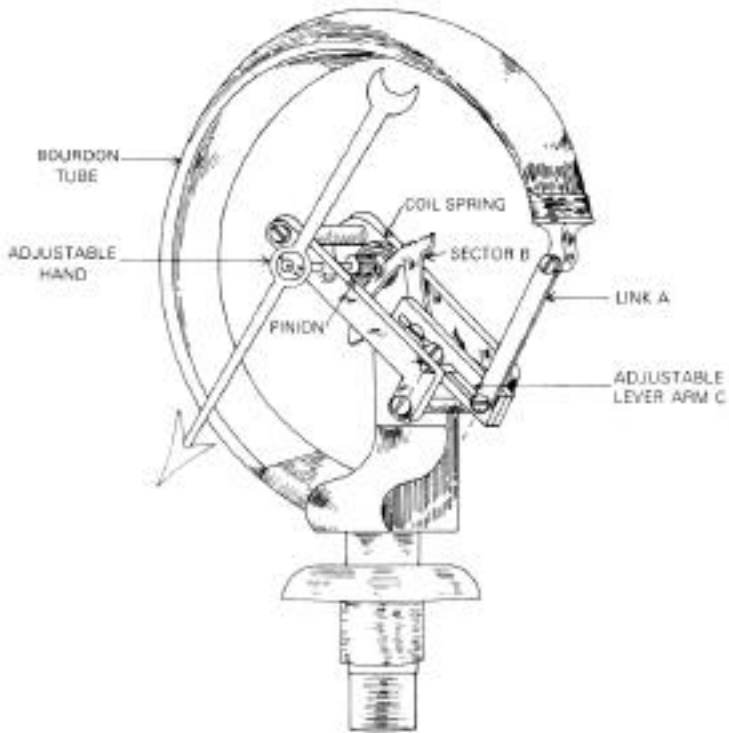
BOURDON PRESSURE GAUGE (INTERIOR VIEW)
